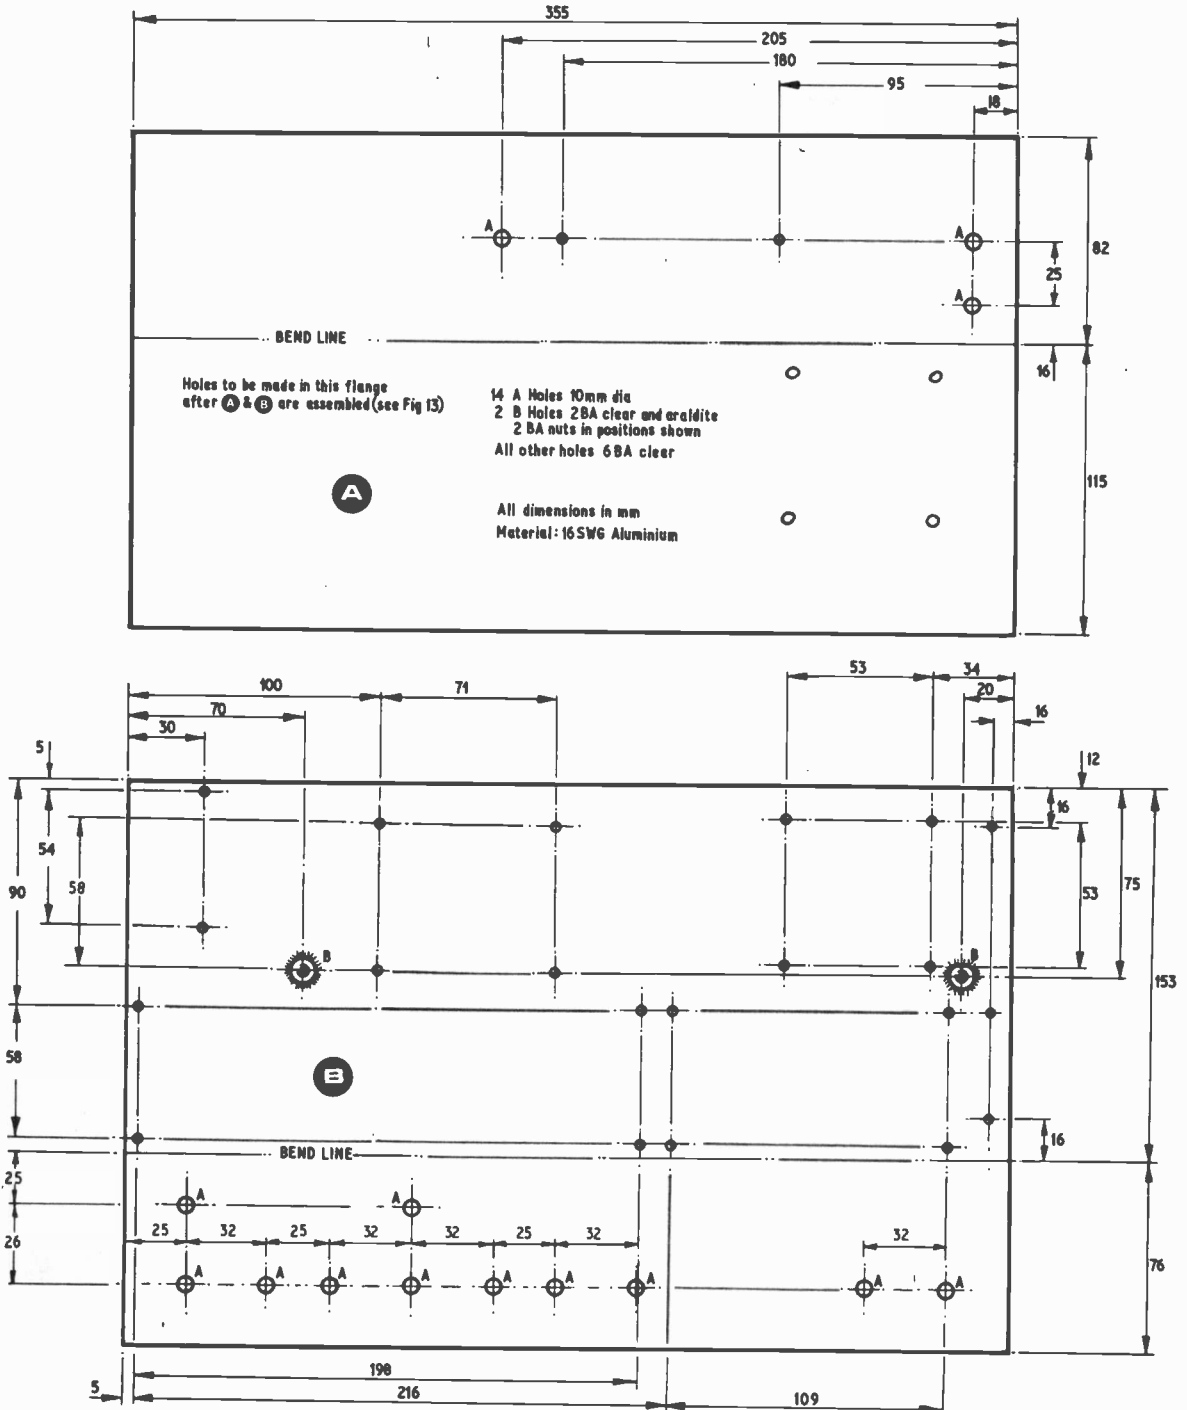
Complete drilling details for the amplifier chassis. The front panel drilling can be marked from panel B
